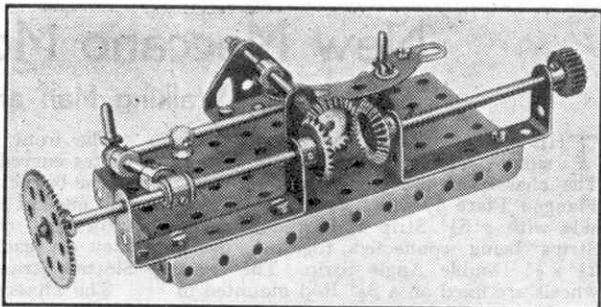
The reversing mechanism designed by N. C. Ta'Bois, which is described in these pages. The illustration shows the gears in the reverse drive position.
